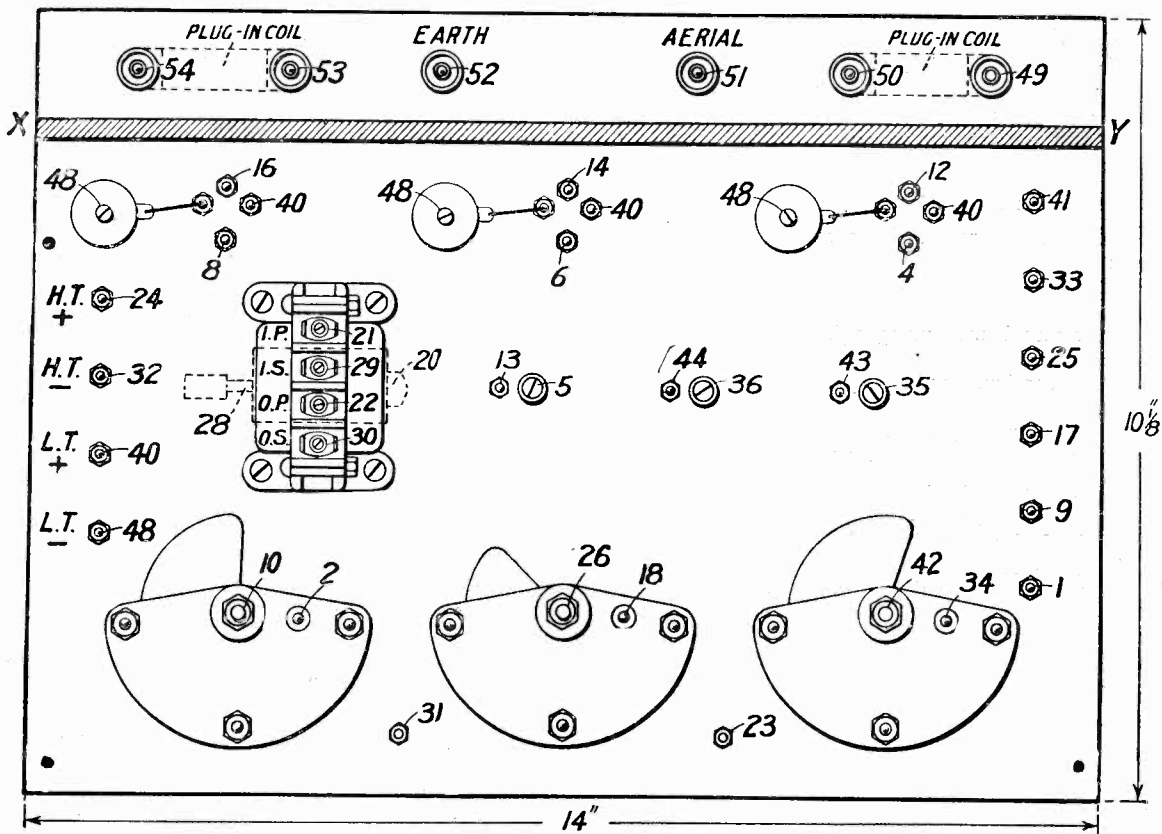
Disposition of parts on rear of front panel, showing method of attaching terminal board.
